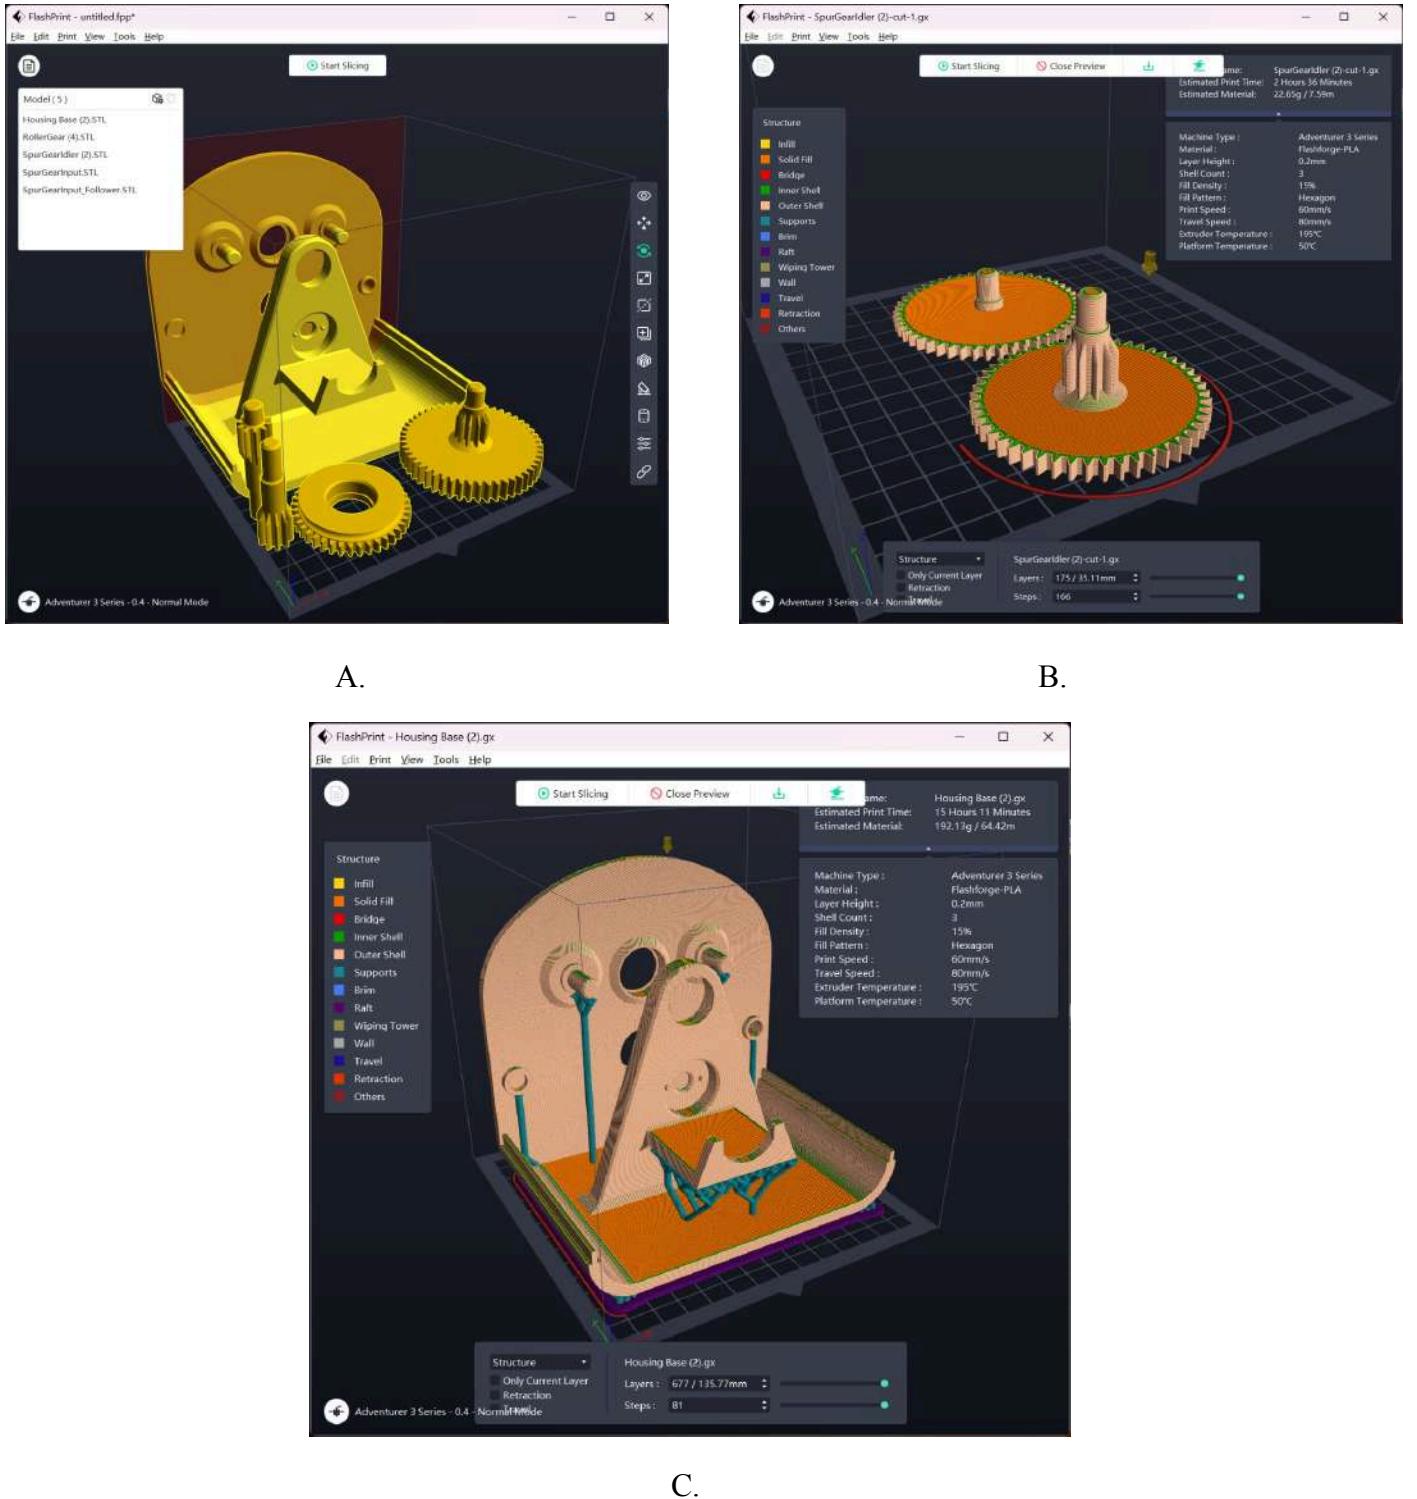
3D printing prototype. A) Initial Printing. B). Gear Printing. C) Housing Printing
